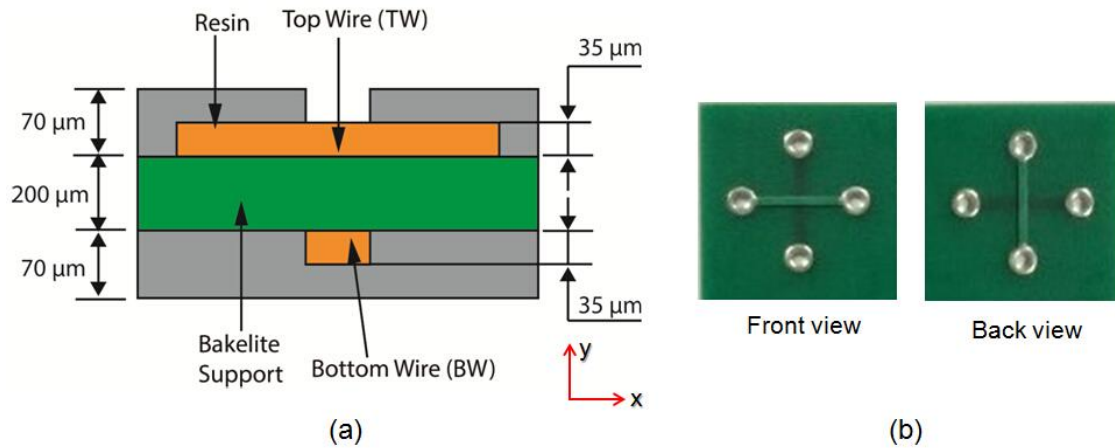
(a) Cross section of the PCB (b) Prototype of PCB
